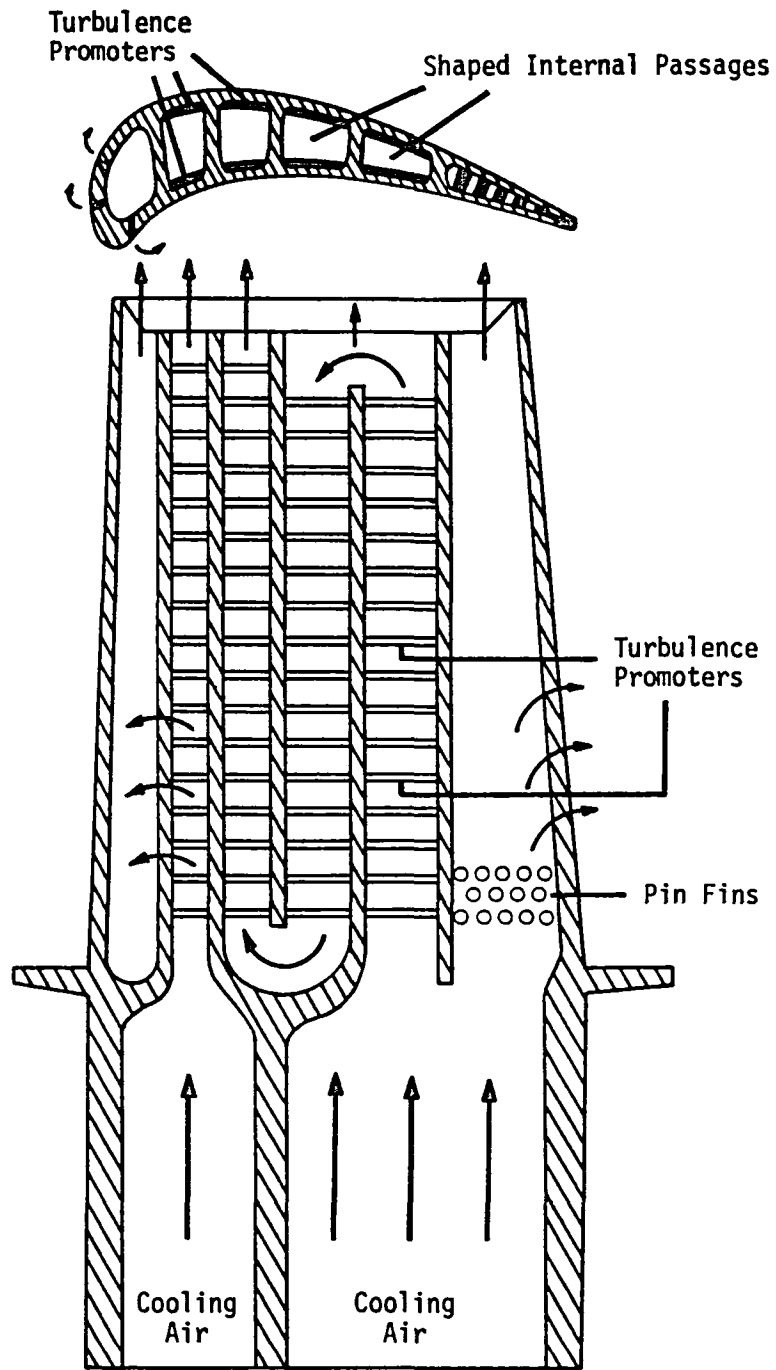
Design Concept of a Modern Internally-Cooled Gas Turbine Blade
